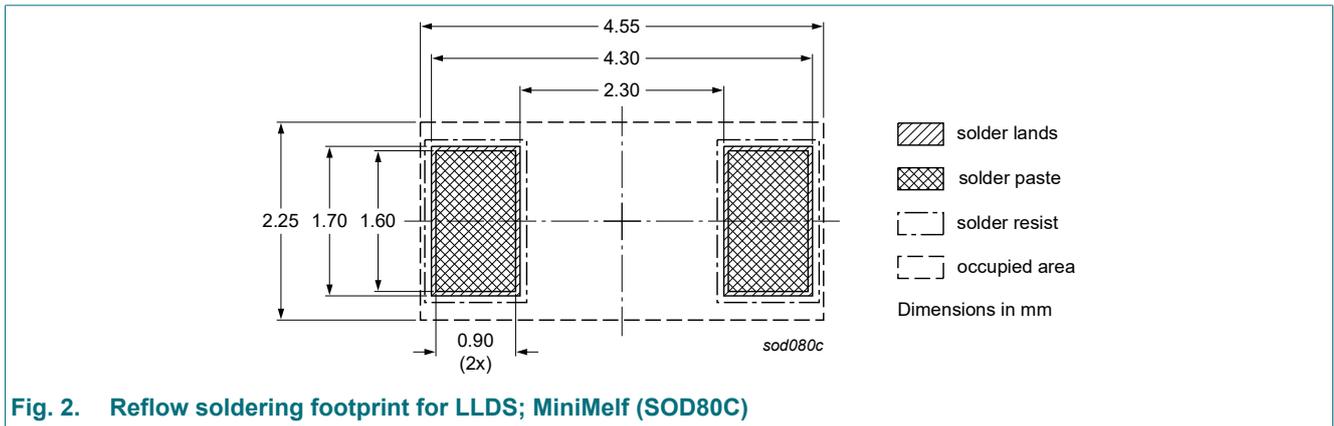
Reflow soldering footprint for LLDS; MiniMelf (SOD80C)
